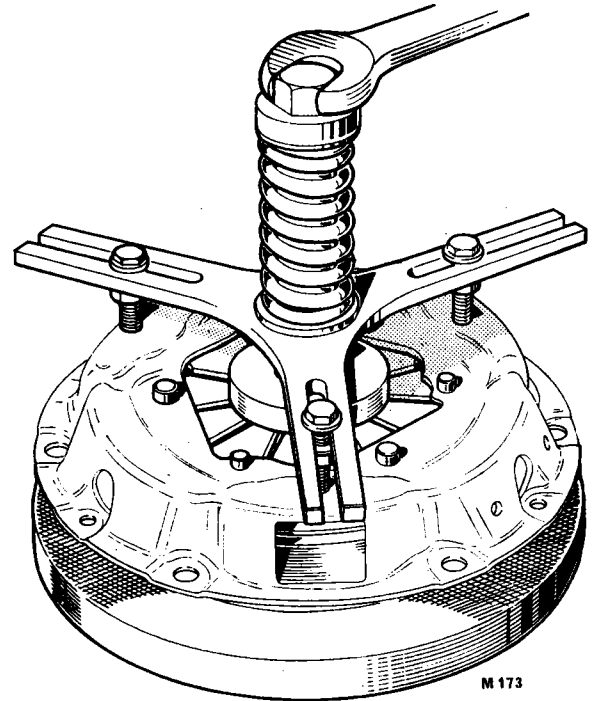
Tighten down the large nut so that the diaphragm spring is compressed flat
